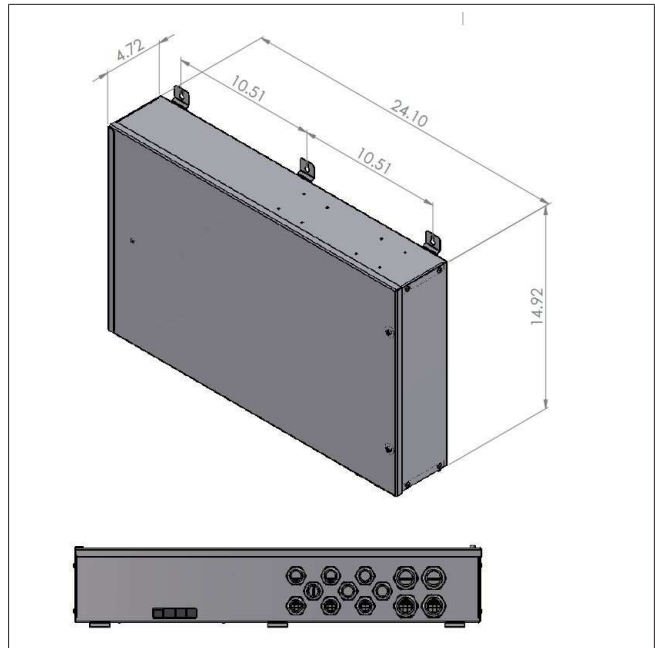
Dimensions (in.) electrical box 2 and 4 stages
